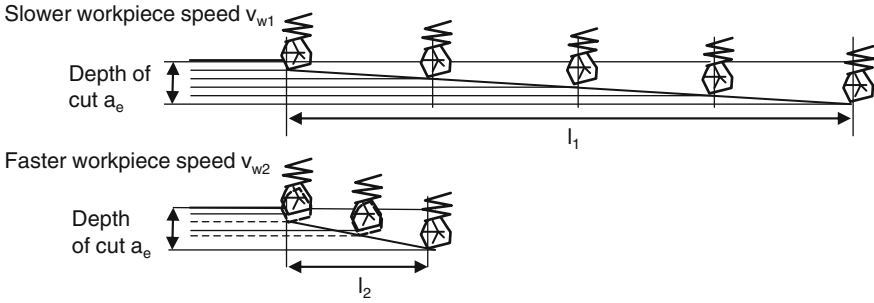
Decrease in cutting edge distance at higher workpiece speed, v_{w2} , after [PEKL57, p. 114]
